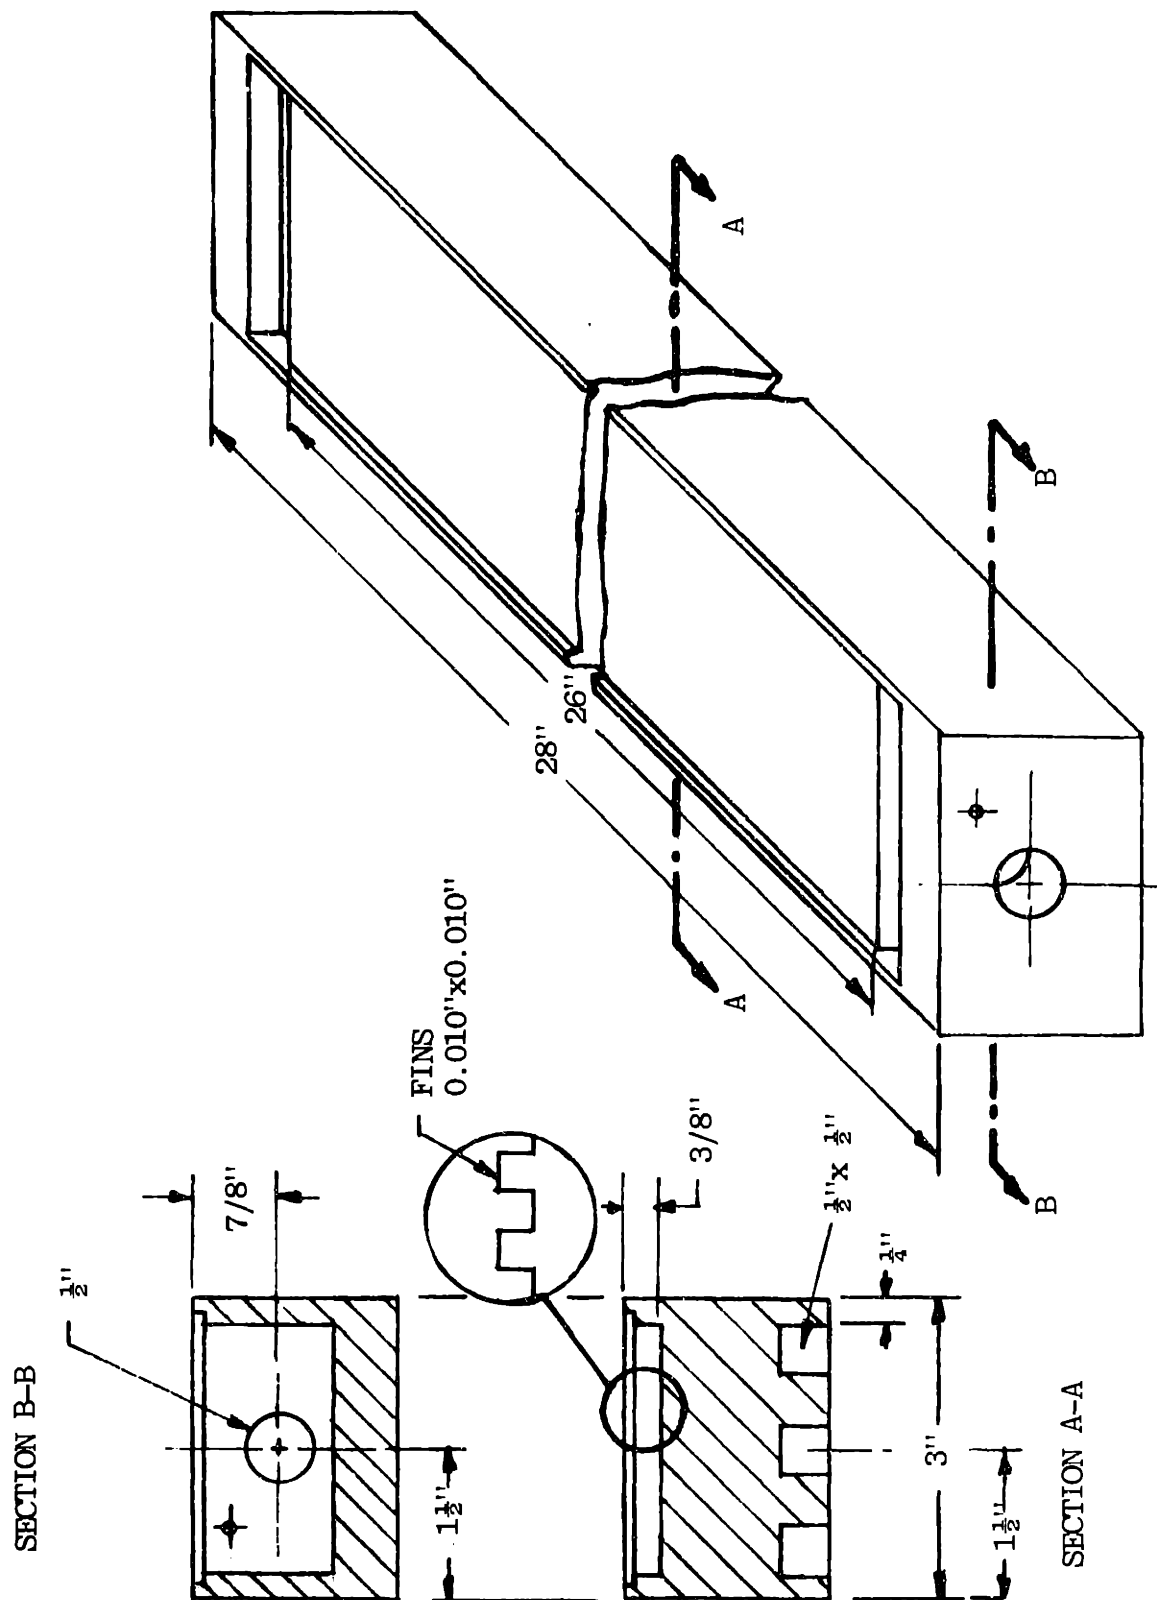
TEST SECTION FEMALE HALF
